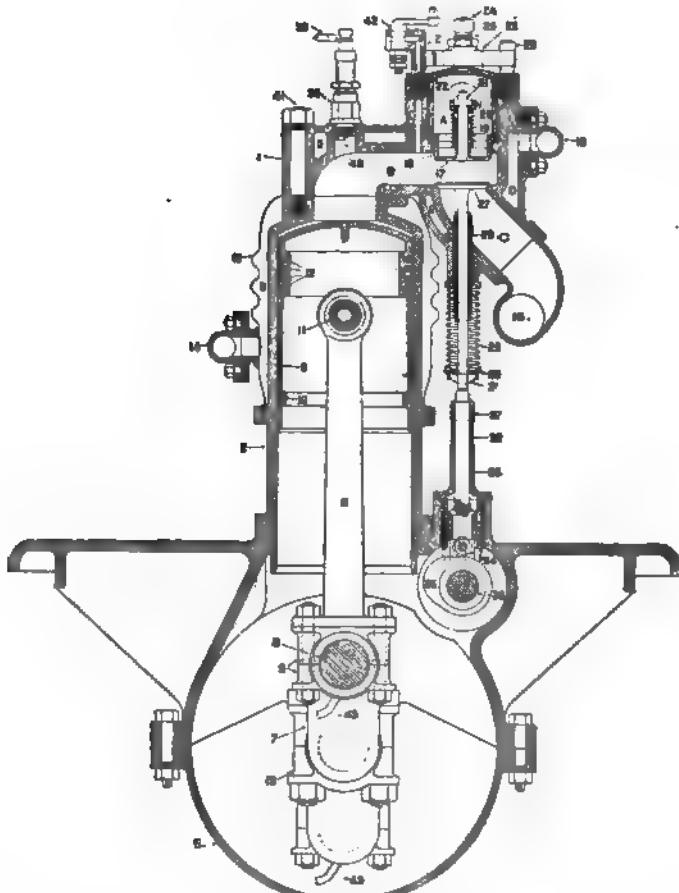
Section through One Cylinder of an Automobile Engine (Pope-Toledo), operated by automatic inlet. The parts are: 1, cylinder head; 2, cylinder; 3, piston; 4, crank case, upper half; 5, crank case, lower half; 6, connecting rod; 7, crank arm; 8, crank pin; 9, crank brasses; 10, crank shaft bearing; 11, piston pin; 12, piston rings; 13, water jacket casing; 14, water inlet pipe; 15, water outlet pipe; 16, exhaust pipe; 17, inlet valve; 18, inlet valve seating; 19, inlet valve spring; 20, inlet valve spring retainer; 21, inlet valve spring retainer key; 22, inlet valve cap; 23, inlet valve yoke; 24, inlet valve set screw; 25, inlet valve set screw lock nut; 26, inlet valve yoke stub; 27, exhaust valve; 28, exhaust valve stem bushing; 29, exhaust valve spring; 30, exhaust valve spring retainer; 31, exhaust valve spring retainer key; 32, exhaust valve push rod; 33, exhaust valve push rod guide; 34, exhaust cam roller; 35, exhaust cam; 36, exhaust cam shaft; 37, dust cap; 38, sparking plug; 39, sparking terminal; 40, sparking points; 41, cylinder head studs; 42, relief cock; 43, oil scoop; A, inlet chamber; B, compression space; C, exhaust passage; D, water space.
